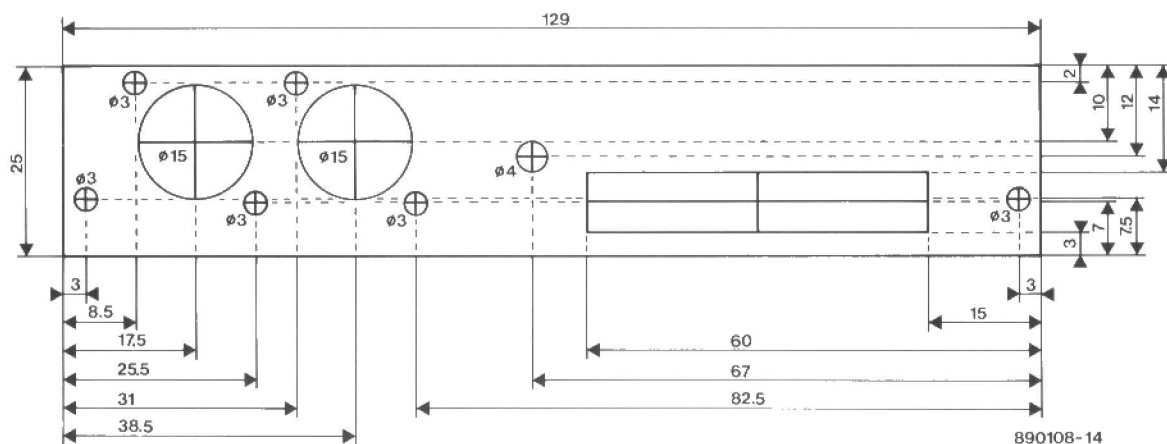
Constructional drawing of the PCB-mounted aluminium bracket that holds the MIDI, AF input, and I/O port sockets.
